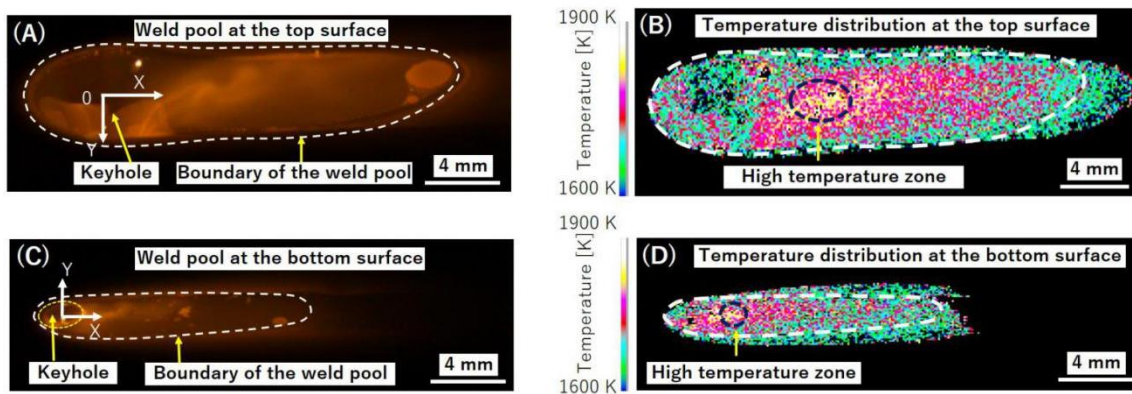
(A) Weld pool image at the top surface; (B) Temperature distribution of the weld pool at the top surface; (C) Weld pool image at the bottom surface; (D) Temperature distribution of the weld pool at the bottom surface [35]
